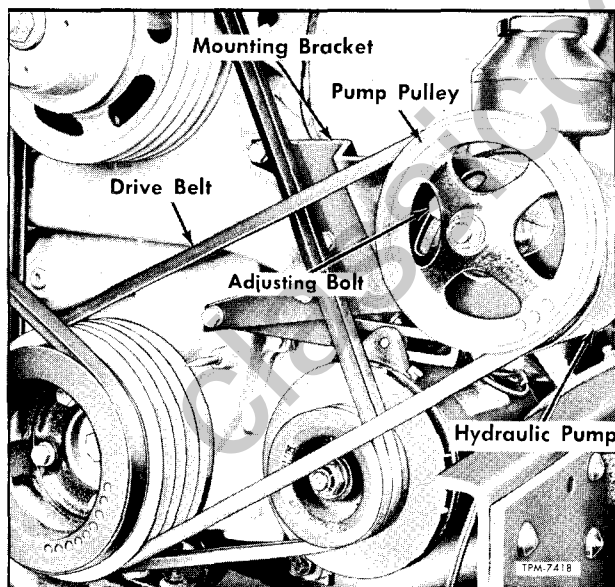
Power Steering Hydraulic Pump Installed (Typical)
